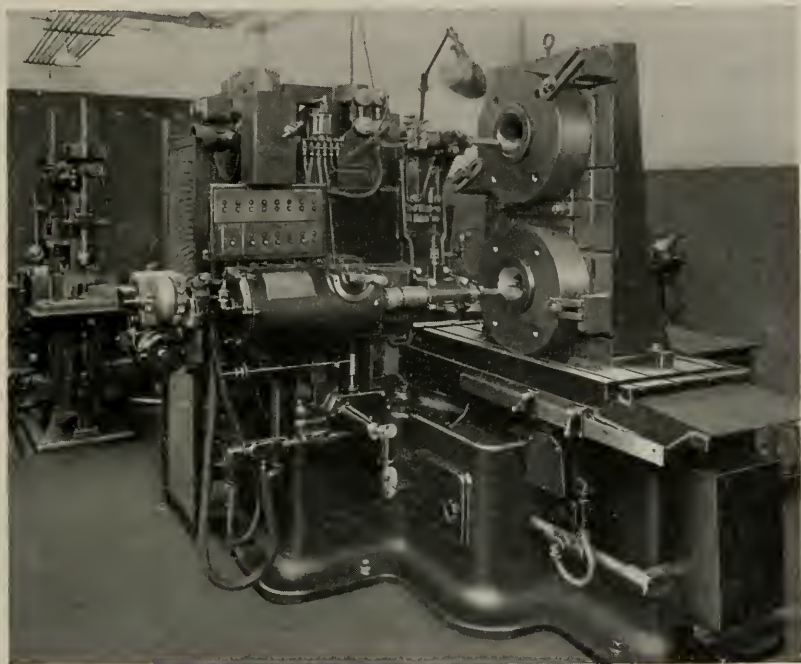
Milling on die sinking machine the contour of die block for sheathing lead-covered cable
